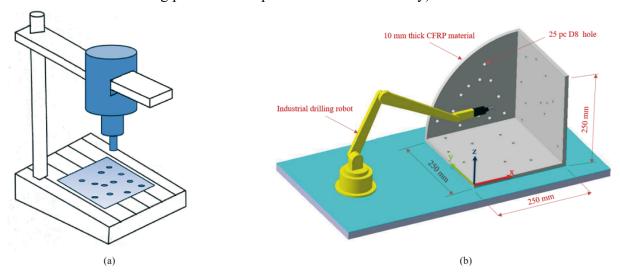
3D model (a) CNC drilling machine (b) industrial robot
